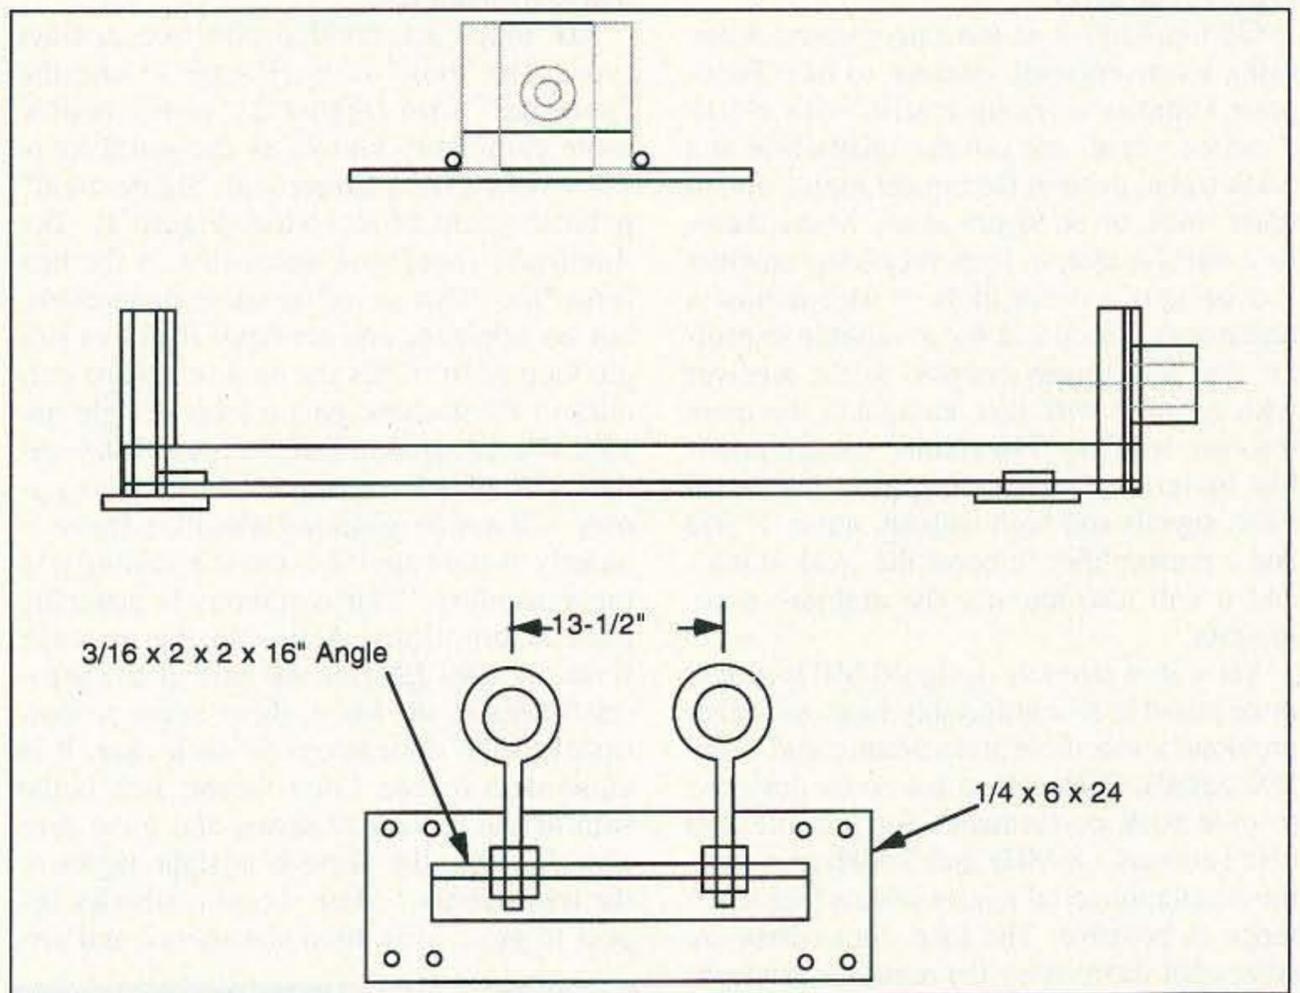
End view (top), side view (middle), and guide cable anchor (bottom).
